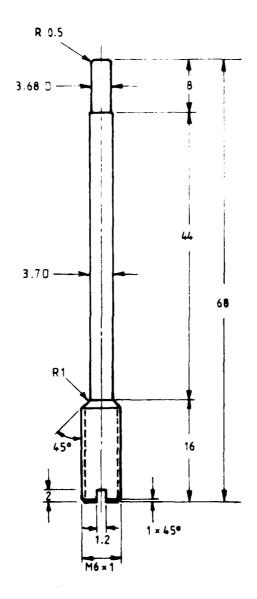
MIRAGE SPAR LOWER REAR FLANGE FATIGUE SPECIMEN
